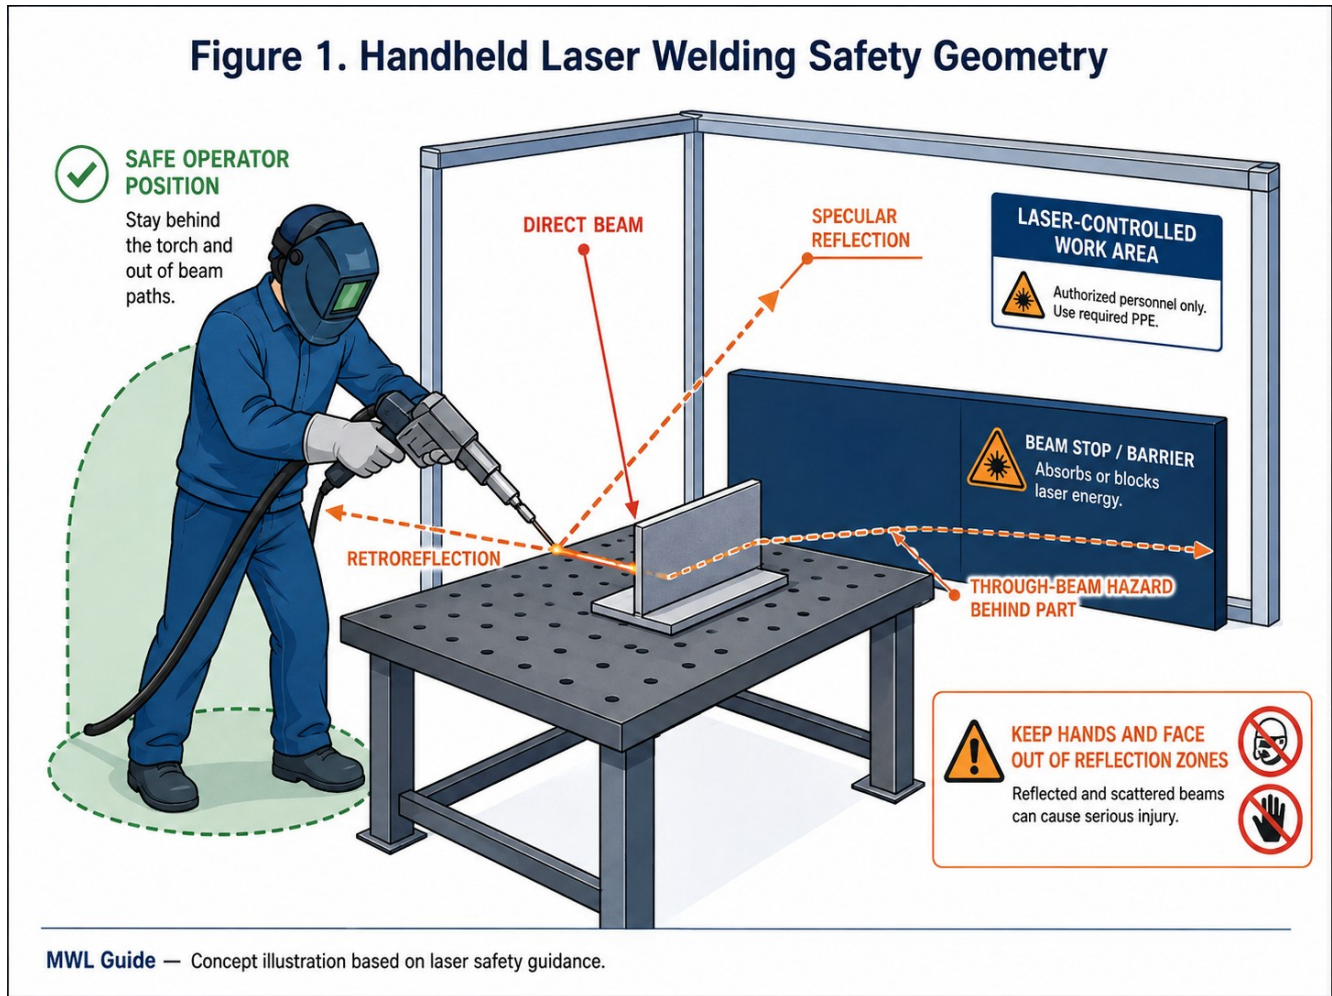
Handheld laser welding safety geometry - original MWL concept illustration.
